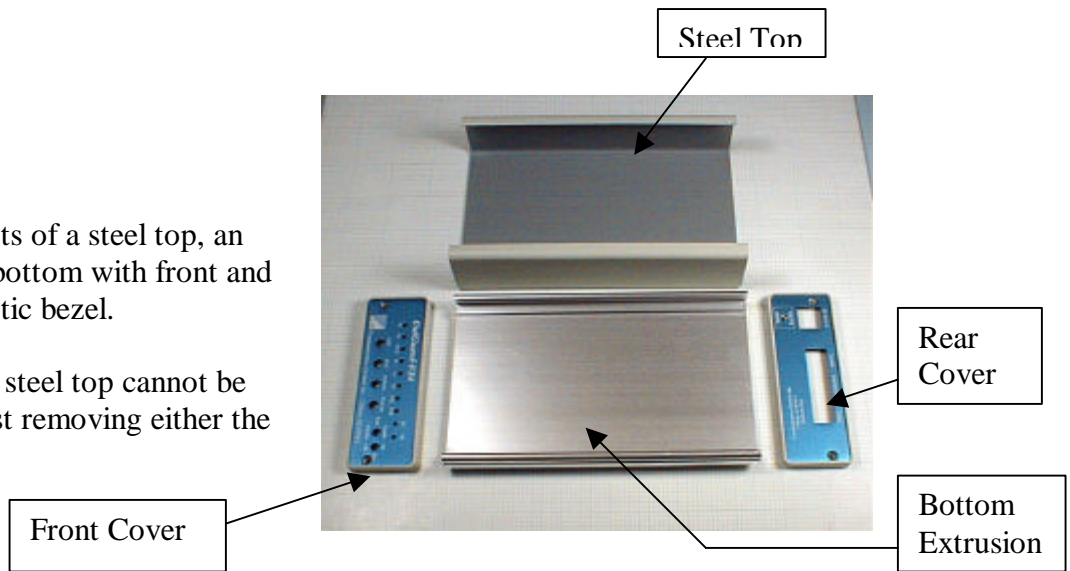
Enclosure showing steel top, extruded aluminum bottom and front, rear covers. Not assembled.
